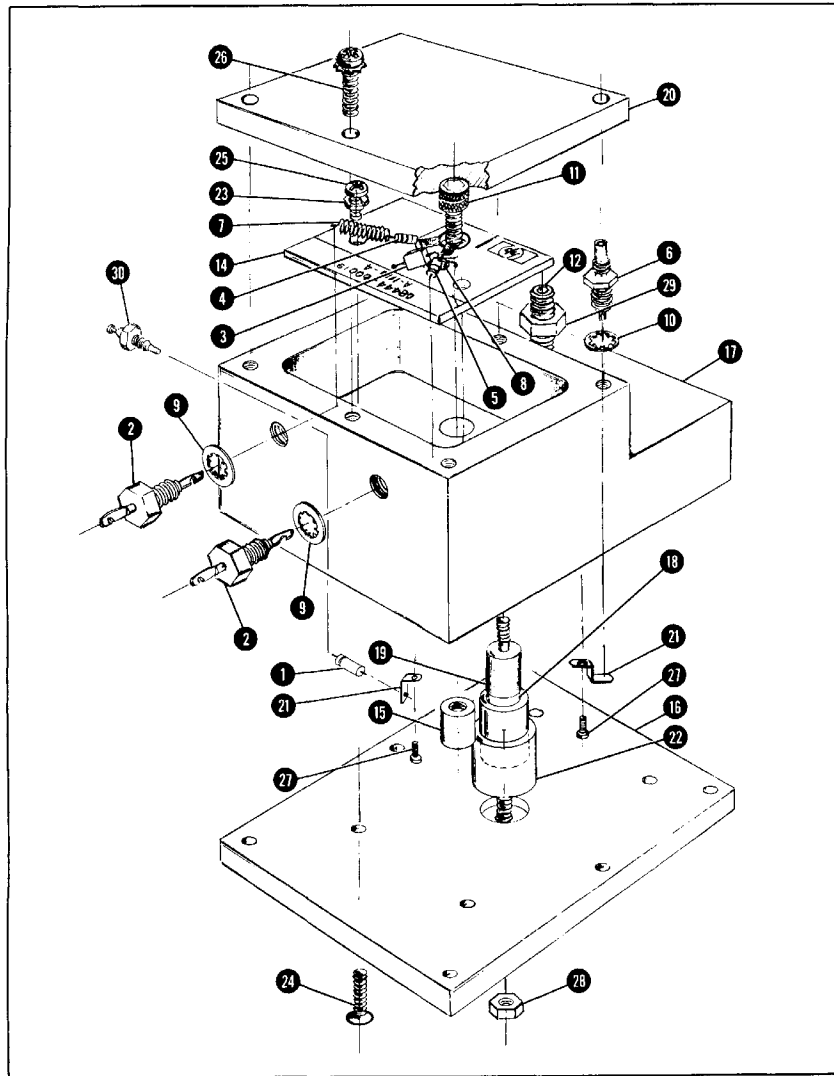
A7 1.55 GHz Oscillator Assembly, Illustrated Parts Breakdown (1 of 2)
